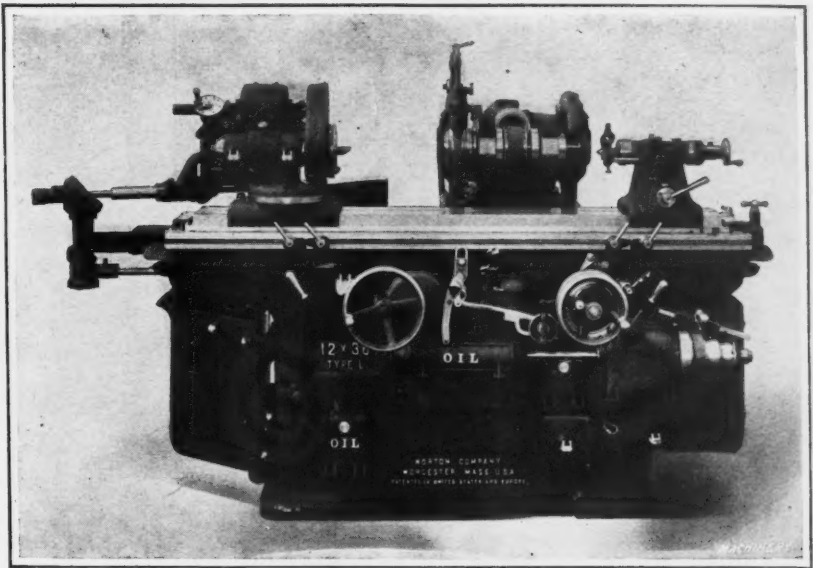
Universal Multipurpose Grinding Machine built by the Norton Co., Worcester, Mass.
